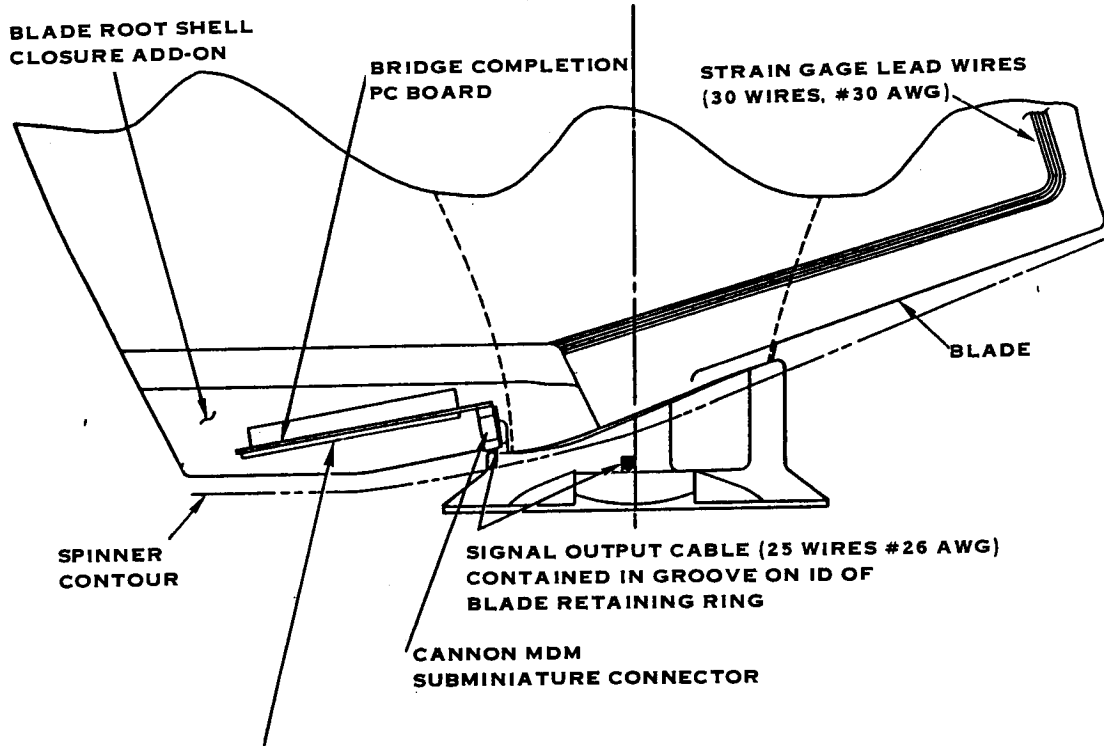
BRIDGE COMPLETION BOARD INSTALLATION
